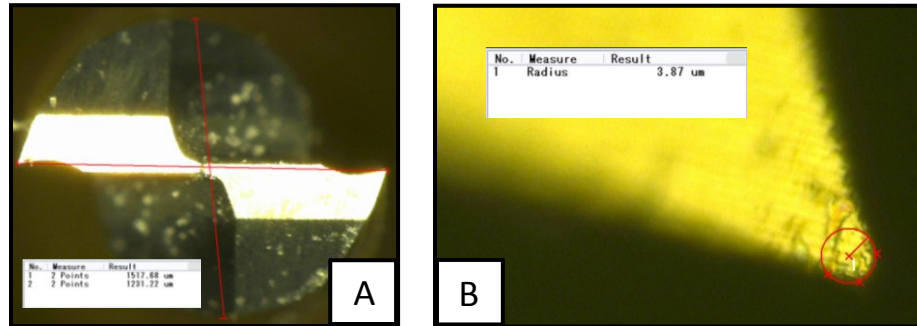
(A) View of endmill tip and cutting diameter (B) Microscope image of endmill tip to approximate cutting edge radius.
